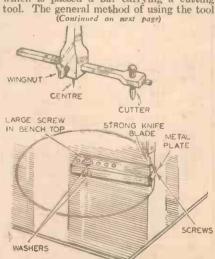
An easily-made tool for cutting large circular holes in plywood, or metal panels.
